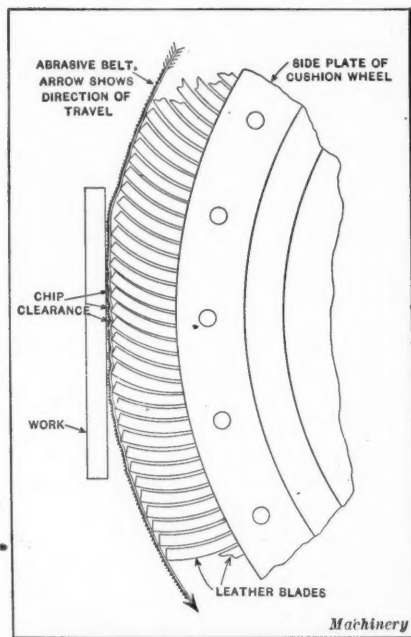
Principle of Supporting Wheel on Machine shown in Fig. 10
